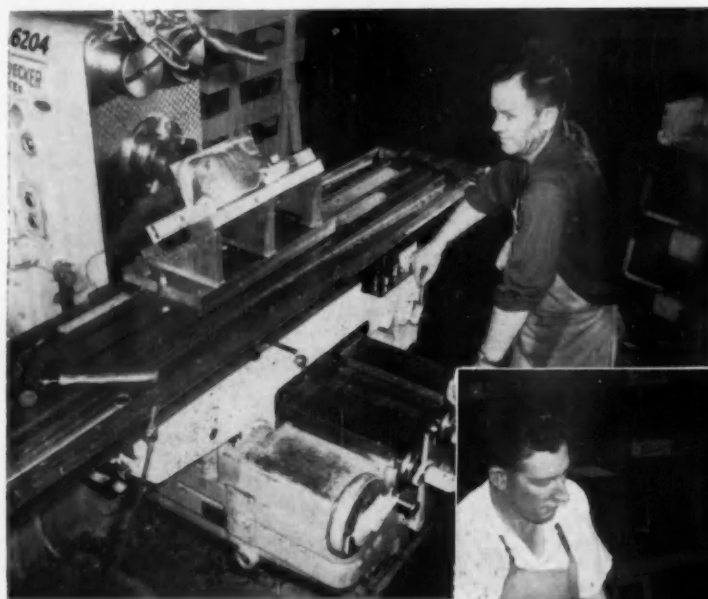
Rough mill cut on angle and on top surface is made on this Kearney & Trecker mill.
